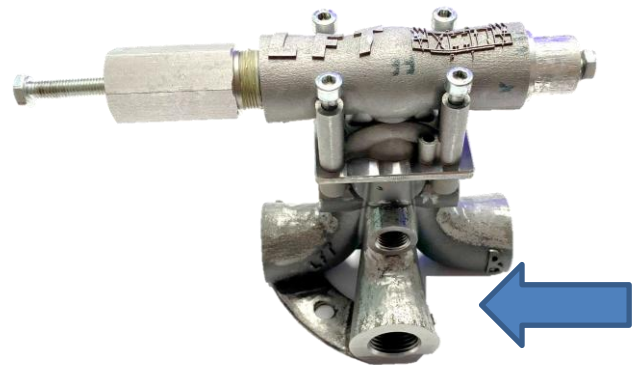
Additively manufactured (AM) base plate with spool valve attached.
